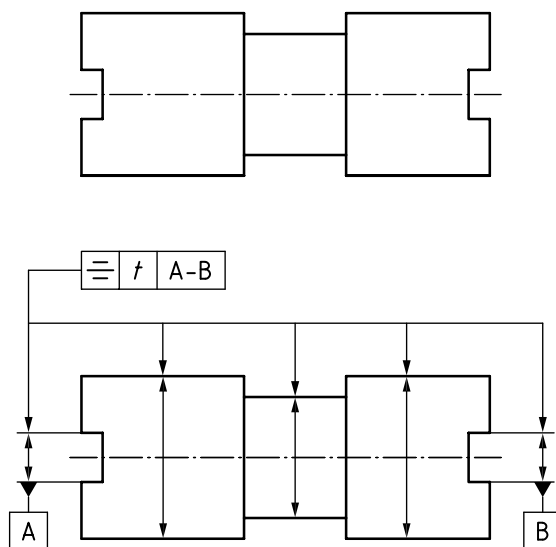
Drawing and meaning of general symmetry tolerances, common datum
